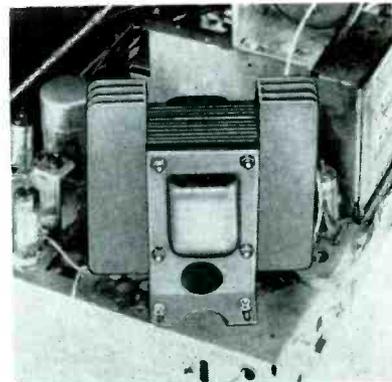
ORIGINAL HORIZONTAL chassis mounting, where fin assembly had to be placed above the chassis. This mounting has been modified as illustrated in Fig. 3.
